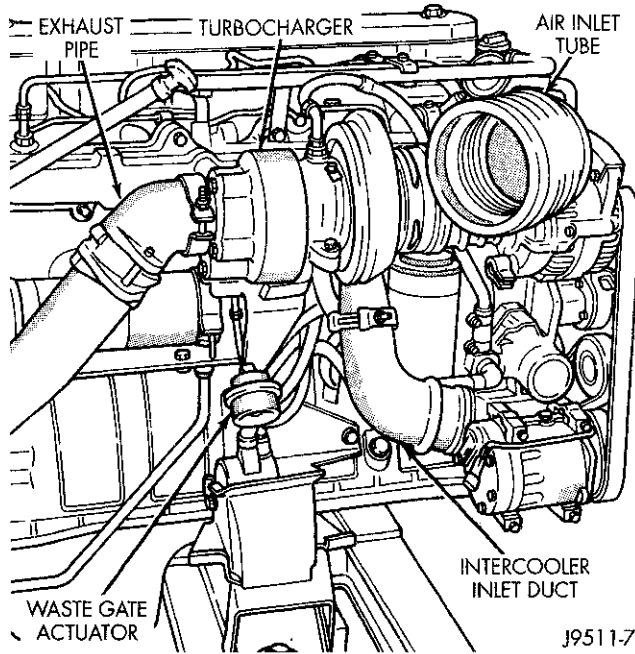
Oil Supply Line and Charge Air Cooler Inlet Duct
